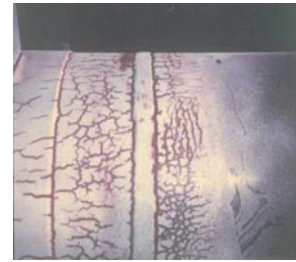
PT Inspection showing extensive PTASCC in the vicinity of welds. (Source: NACE SP0170)
